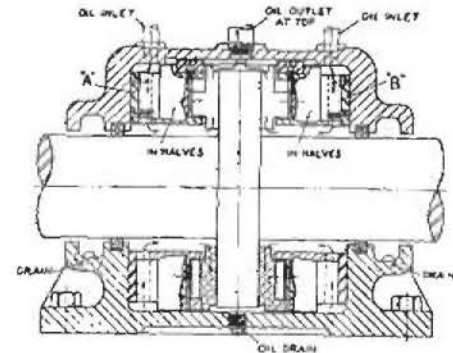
Simple horizontal mounting for double thrust bearing of Style JJ, BB or NN. Collar is integral with shaft. Forced lubrication is used, with two inlets and one outlet.
